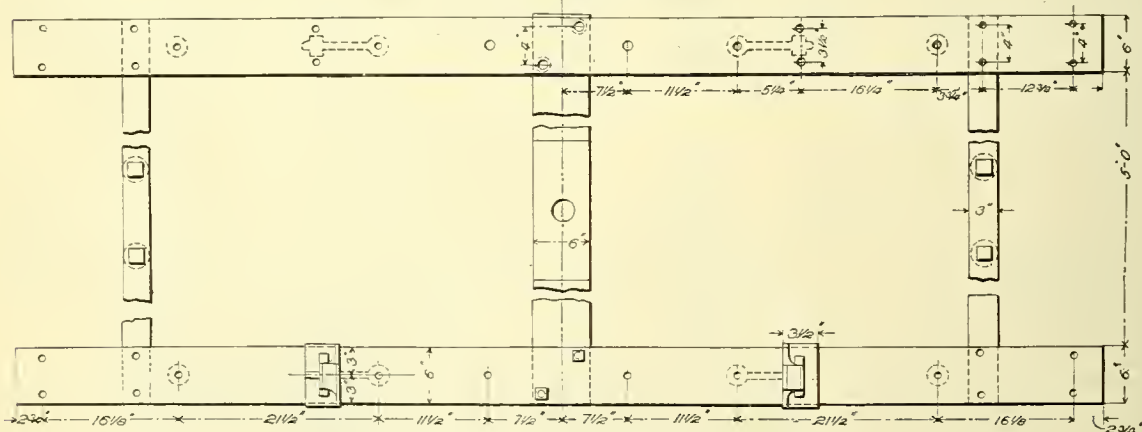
Plan of Bolster and Connecting Trusses.
